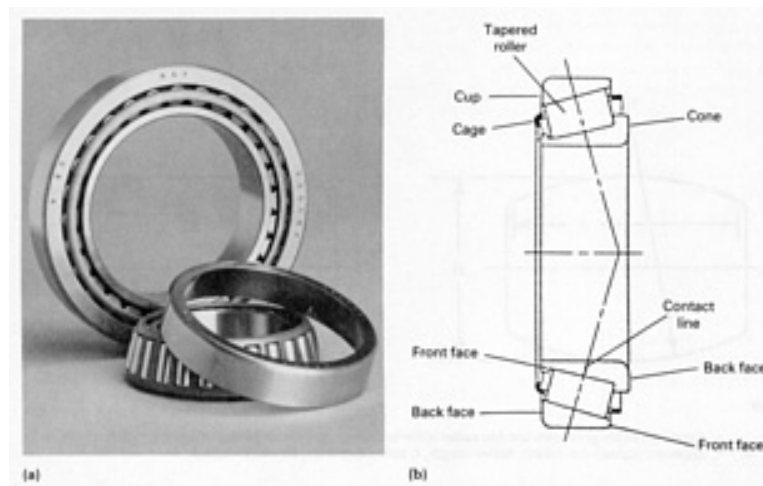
Key components of a tapered roller bearing. (a) Photograph showing cone assembly and cup of the typical roller bearing shown in background. (b) Schematic of a cross section of a tapered roller bearing
